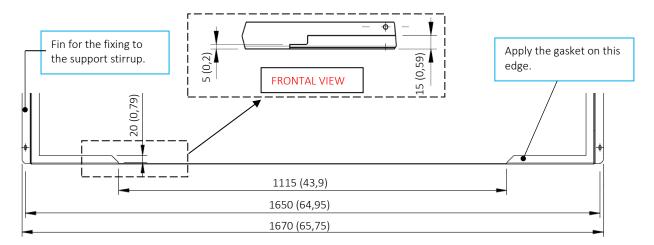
Particular of frame [34]. Detail: frame cut to insert the protruding part of the mirror. Dimensions mm (in).
